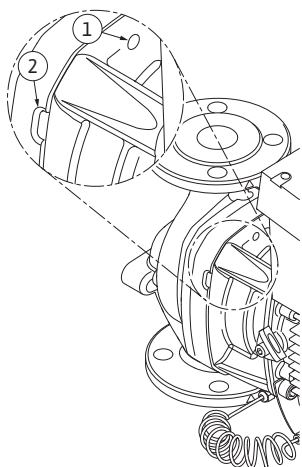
Threaded holes and slots for pressing off the motor impeller unit from the pump housing
